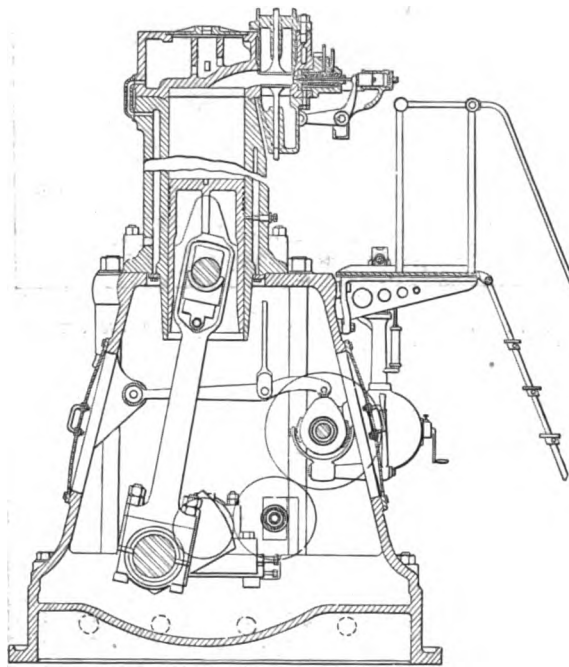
SECTIONAL DRAWING OF THE AMERICAN DIESEL ENGINE
